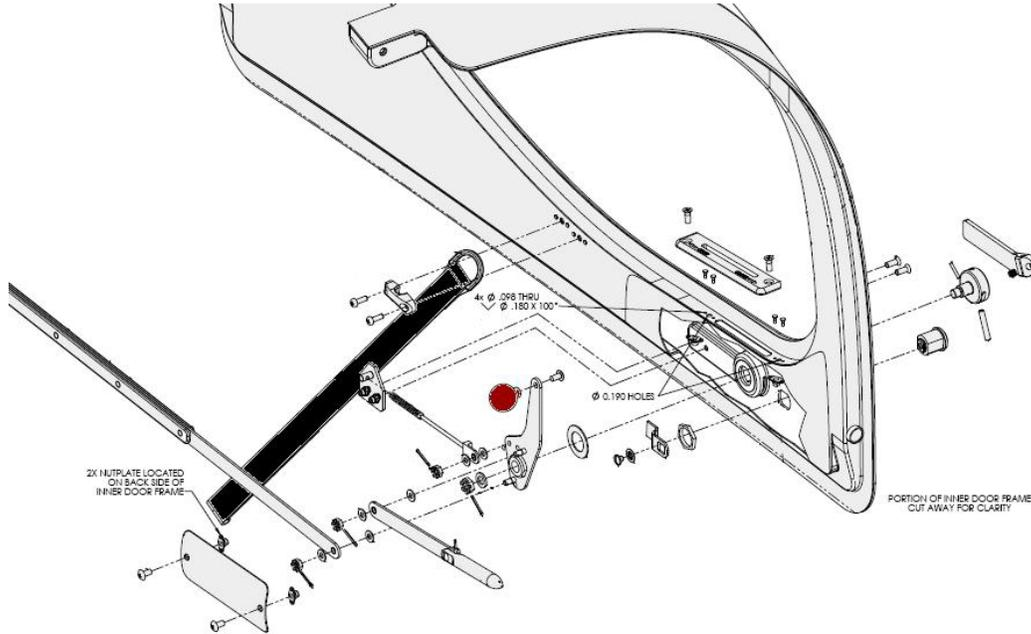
Exploded View of the Door Latch and Lock Mechanisms
